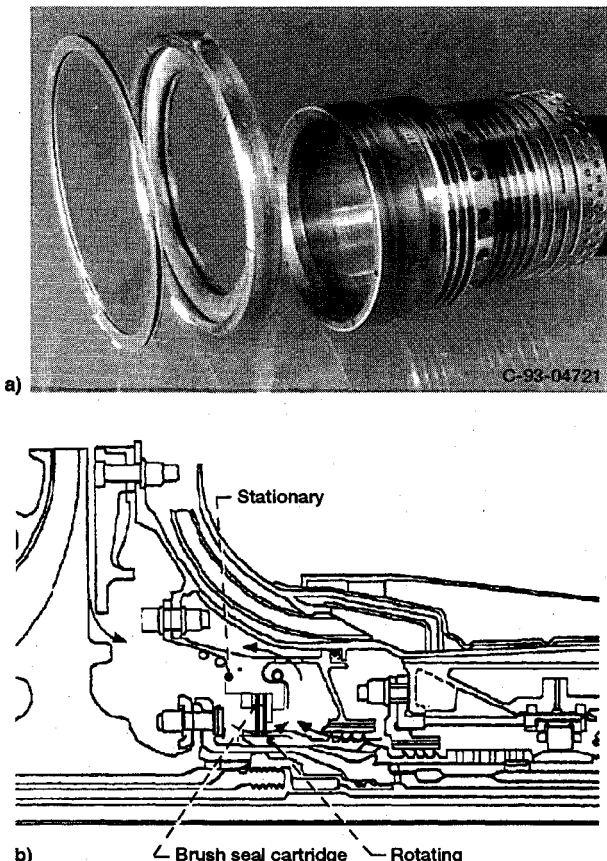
T-700 helicopter brush seal test hardware and schematic²⁶: a) exploded view of dual-brush compressor discharge seal system and b) brush seal package and airflow.
